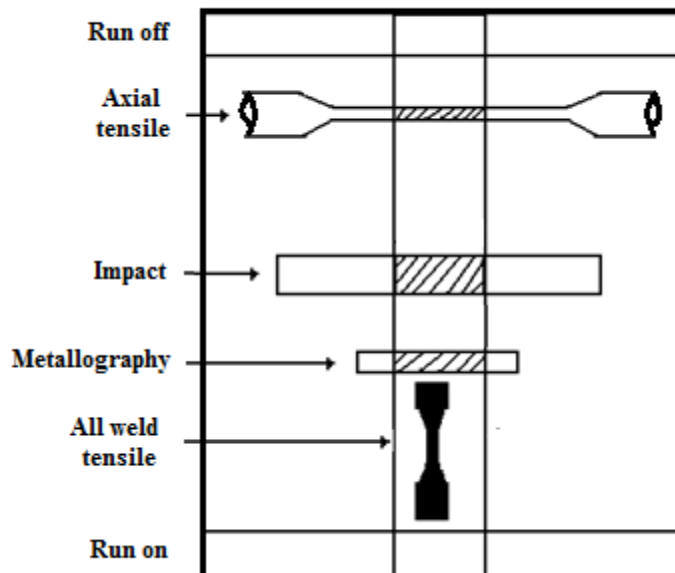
Schematic diagram of collection of test specimens from the weld joint.
